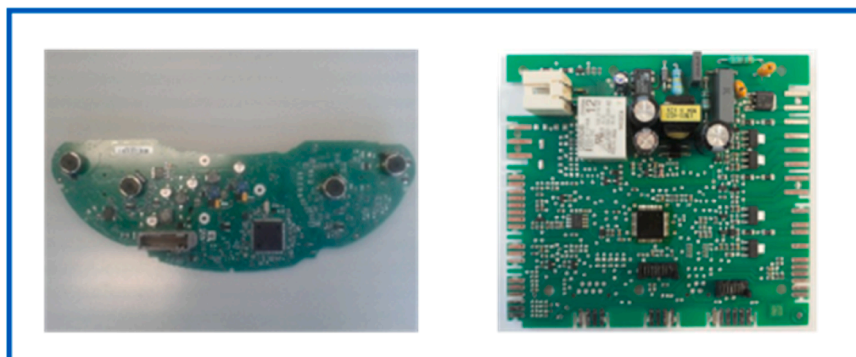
Automotive PCB 2 and Household appliance PCB 2.
